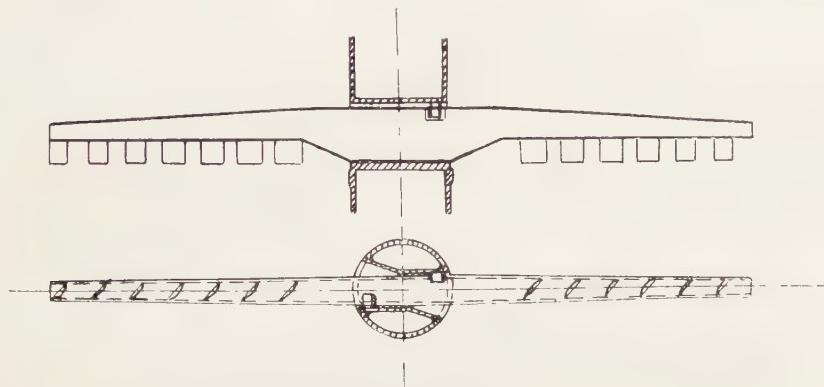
Section showing method of attaching the rabble arms employed in the Kauffmann roasting furnace.
